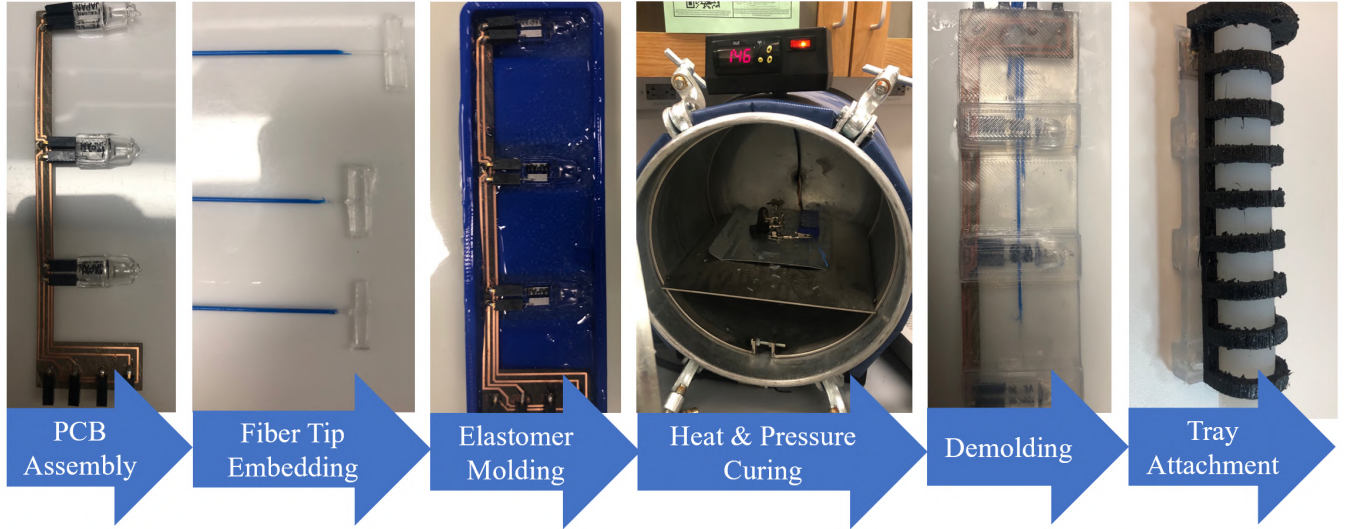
Fabrication steps for fiber optic sensor tray and attachment to soft gripper finger.
